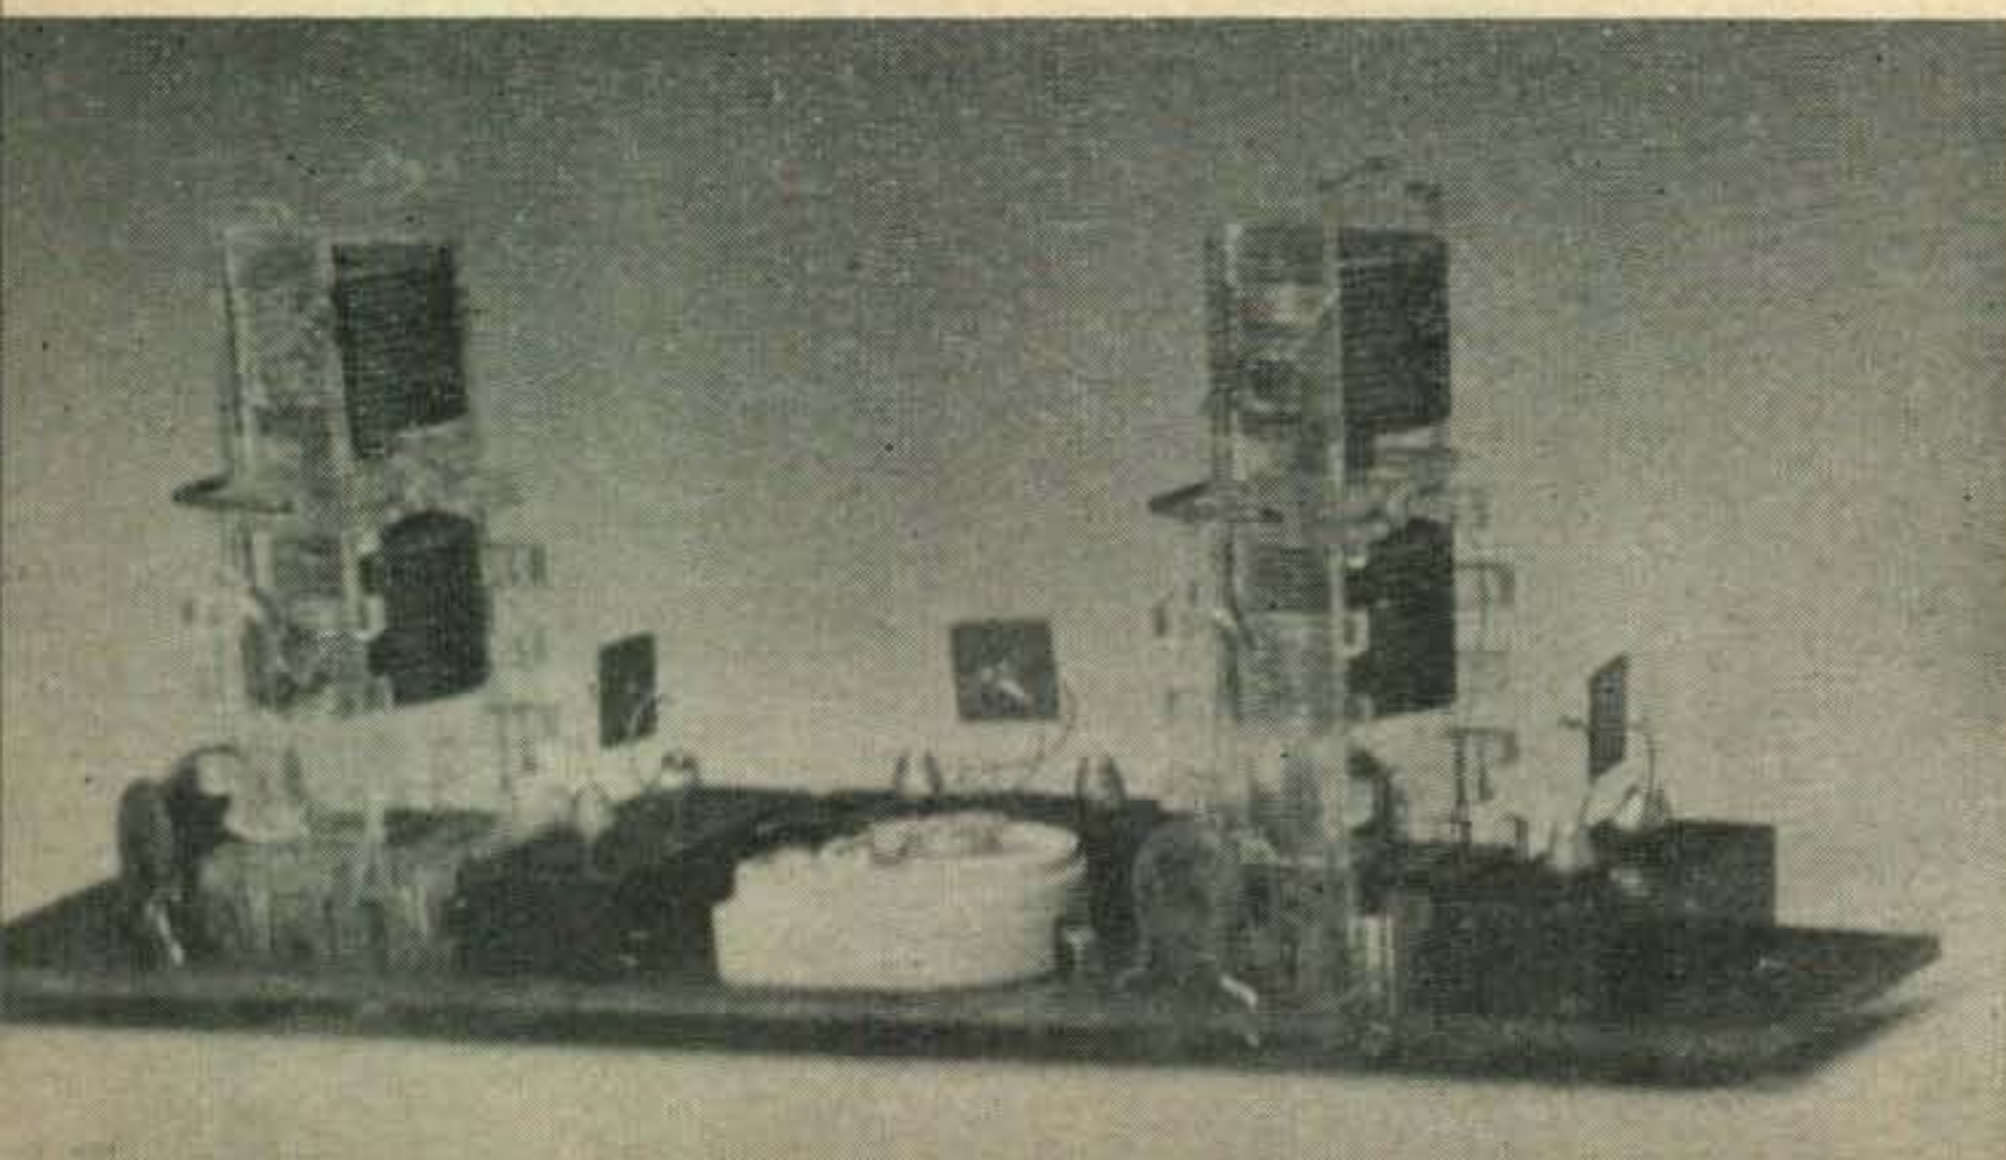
Access holes through the etched circuit board allow removal of the crystal covers for inspection of the tiny crystal wafers. Transformer cans are also removed in this photograph to show the variable cores around the transformer windings.
